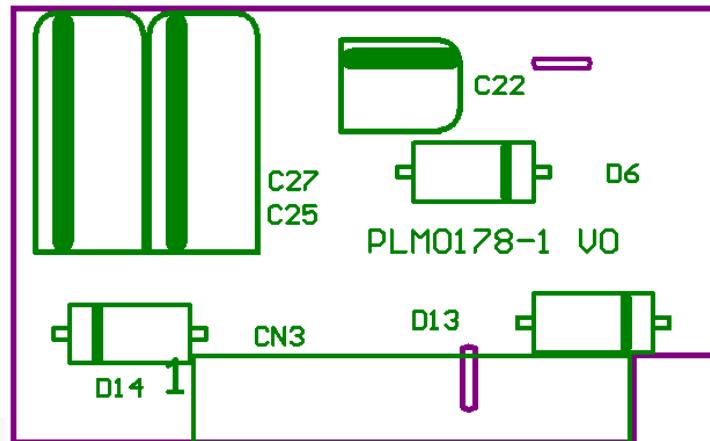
Evaluation Board Layout (Daughter Card), Top Overlay
